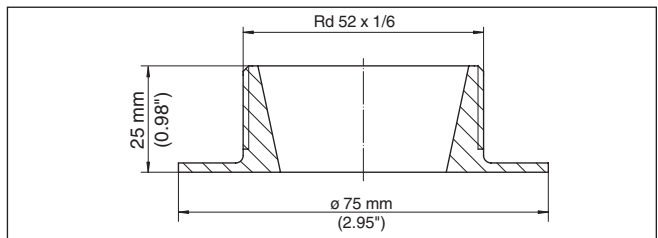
Dimensions of welded socket, conus connection DN 25
